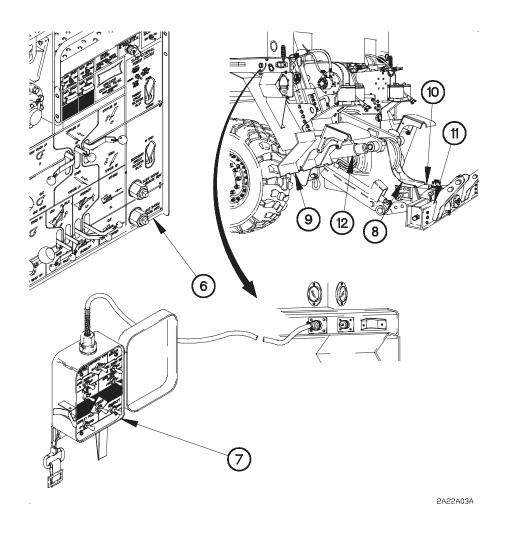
Material Handling Crane (MHC), 30K Winches, and Underlift Assembly (Cont)
